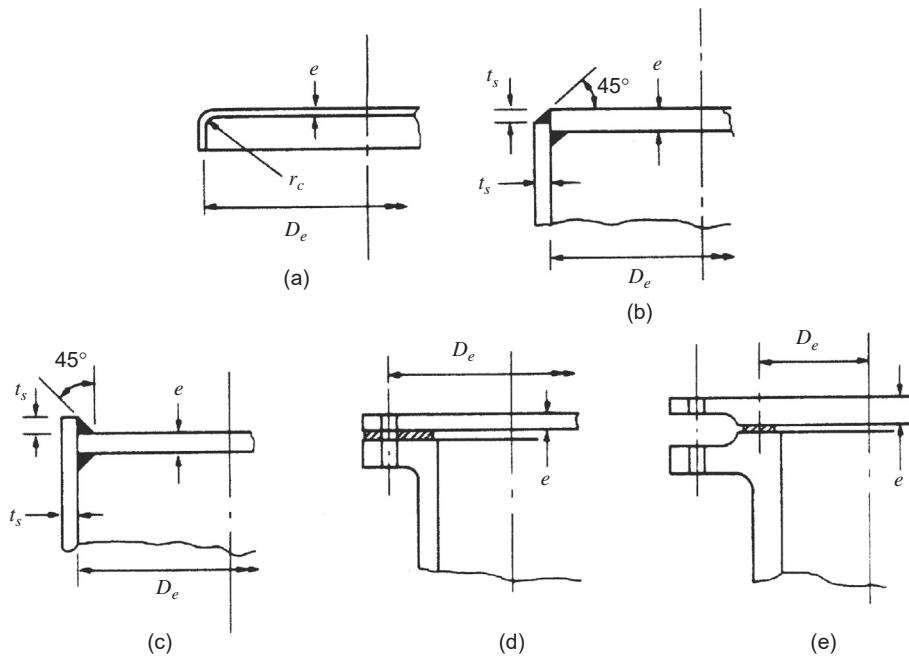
Flat-end closures. (a) Flanged plate. (b) Welded plate. (c) Welded plate. (d) Bolted cover. (e) Bolted cover.
